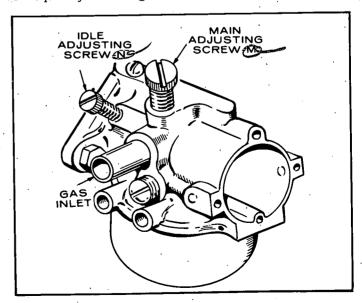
GAS CARBURETOR ADJUSTMENT
